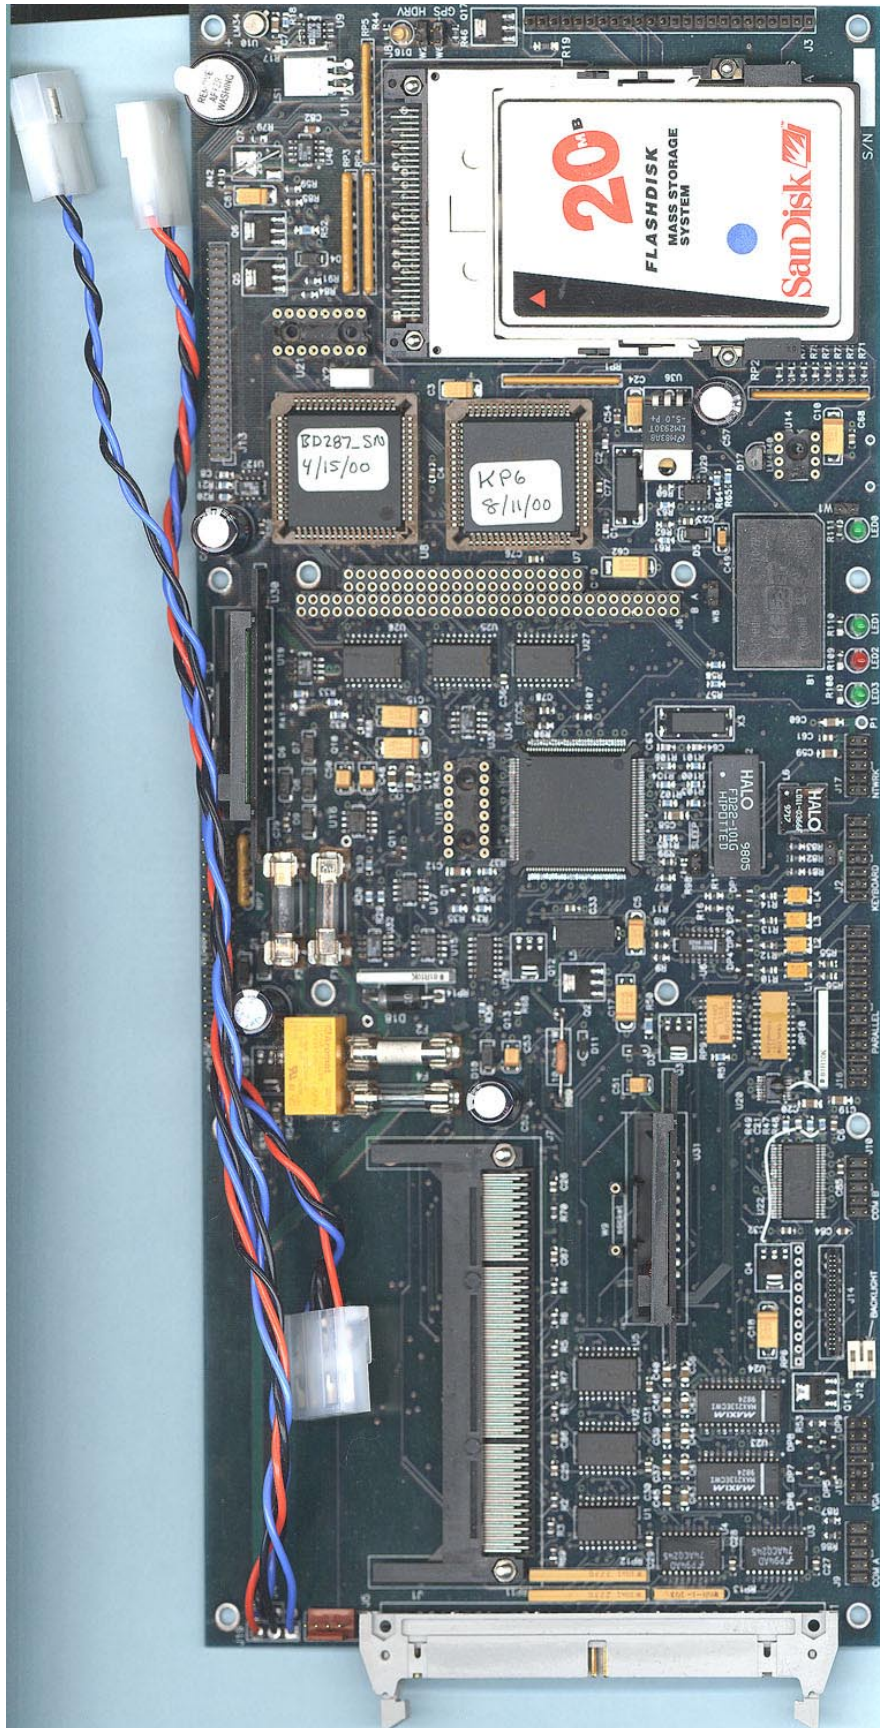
BD287 including the flash disk (top) and the Card PC socket (below)
